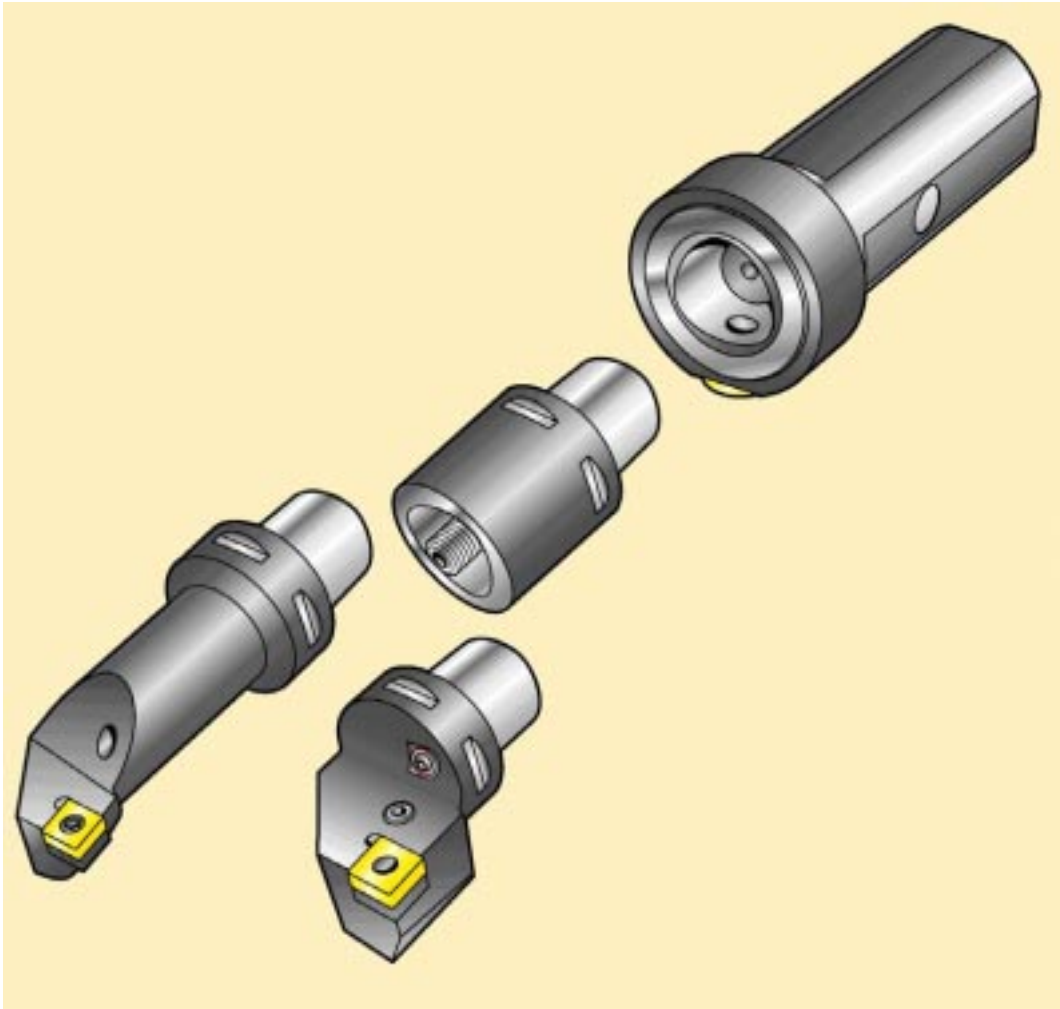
Modular tooling used for turning tools (Courtesy Seco Tools, Sweden)
